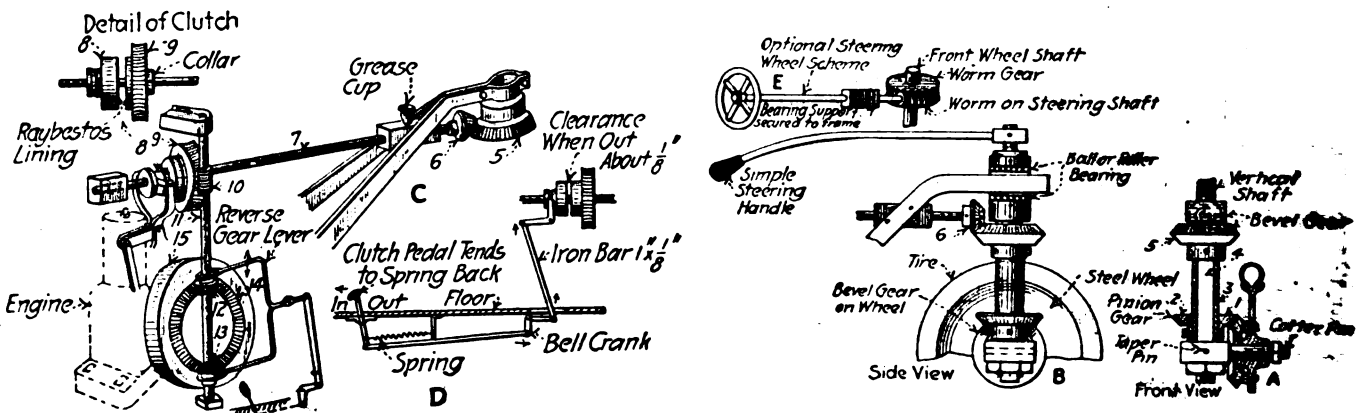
For Those Desiring to Build a More Elaborate Tricycle Type of Motor Car with a Heavier Engine Than That Found on the Patented Motor-Wheel Units, a Special Design Is Illustrated Above Whereby Clutch and Reverse Mechanisms Are Included, Together with Provision for Using an Ordinary Gasoline Engine Rated at 1 1/2 to 2 H. P. or More, the Power Being Transmitted to the Front Wheel of the Car by the Gearing Shown.
